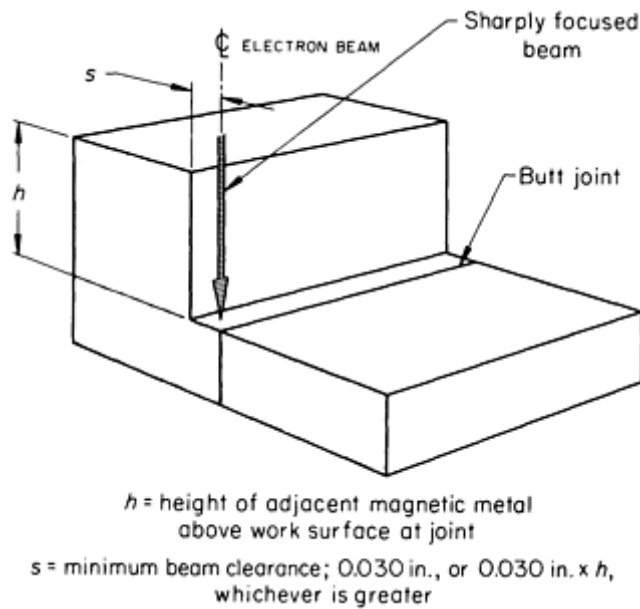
JOINT LOCATION AND BEAM CLEARANCE FOR AN EBW BUTT JOINT NEAR A PROJECTING CORNER, T, OR SHOULDER CONSISTING OF MAGNETIC WORK METAL
